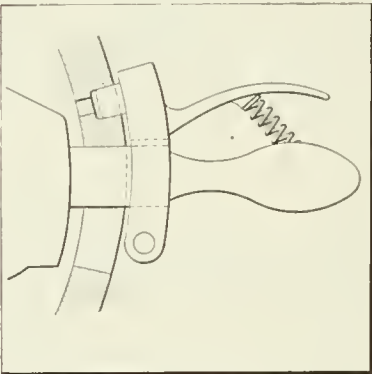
Withdrawing and Locking Device on Change-gear Box
